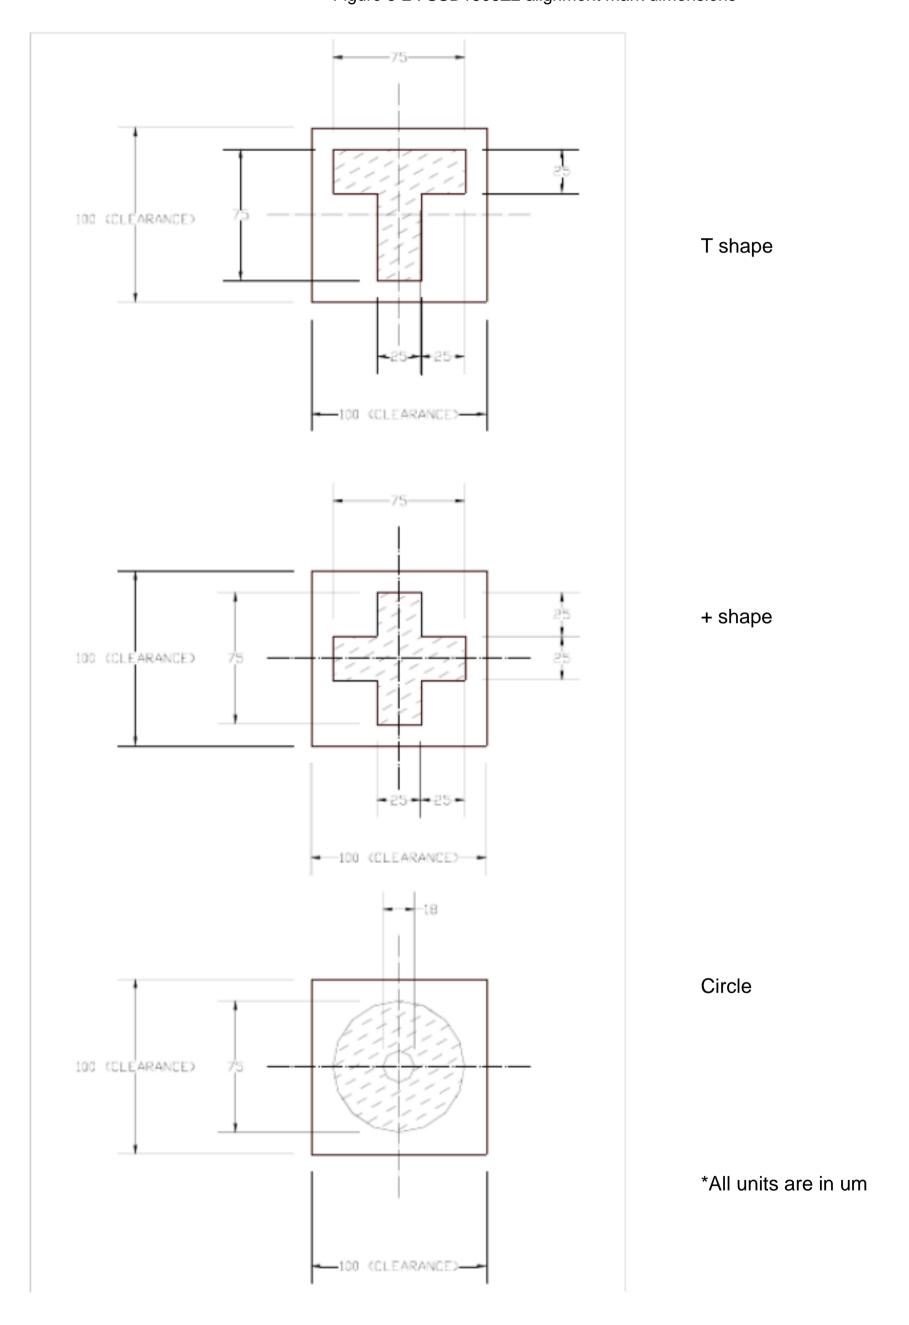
SSD1306Z2 alignment mark dimensions
